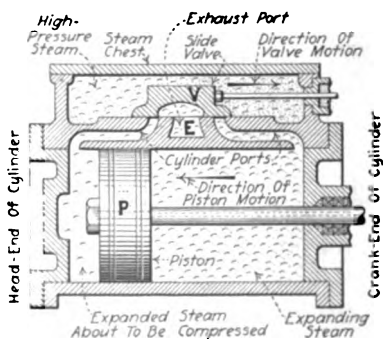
Point of head-end compression—the expanded steam remaining in the head end of the cylinder is about to be compressed by the piston.
